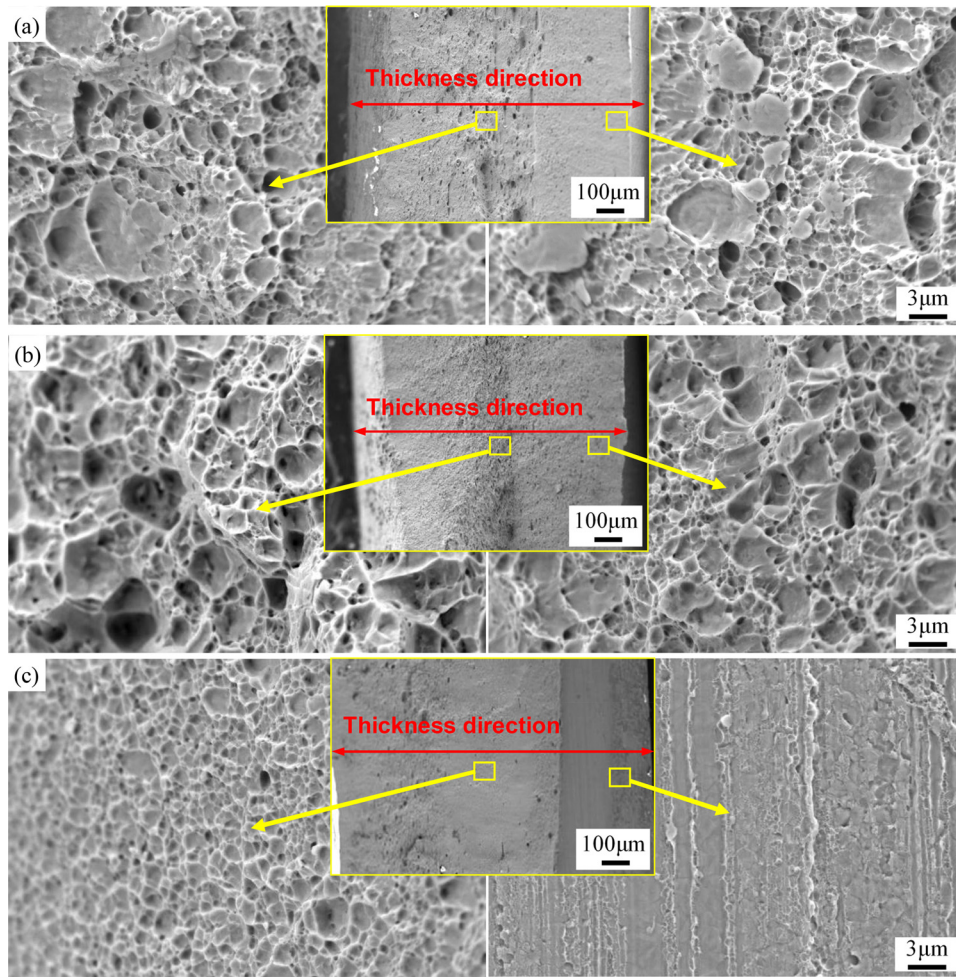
Fracture surfaces of welded joint: (a) 4 m/min, (b) 8 m/min and (c) 10 m/min.
